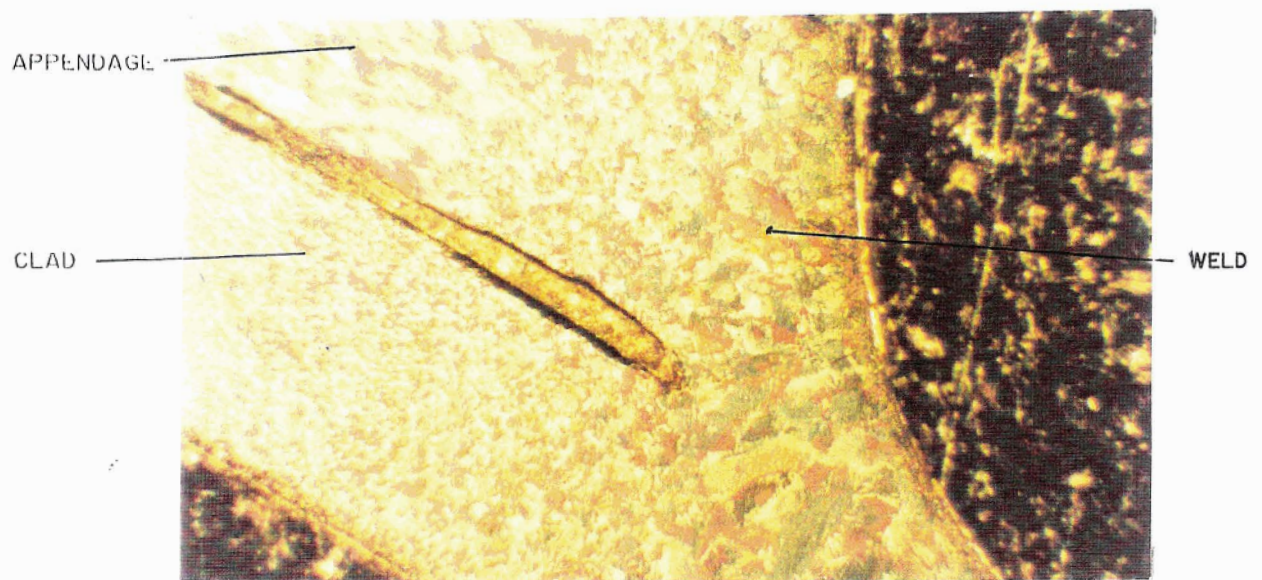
ZIRCALLOY-2 CLAD TO APPENDAGE LASER WELD
